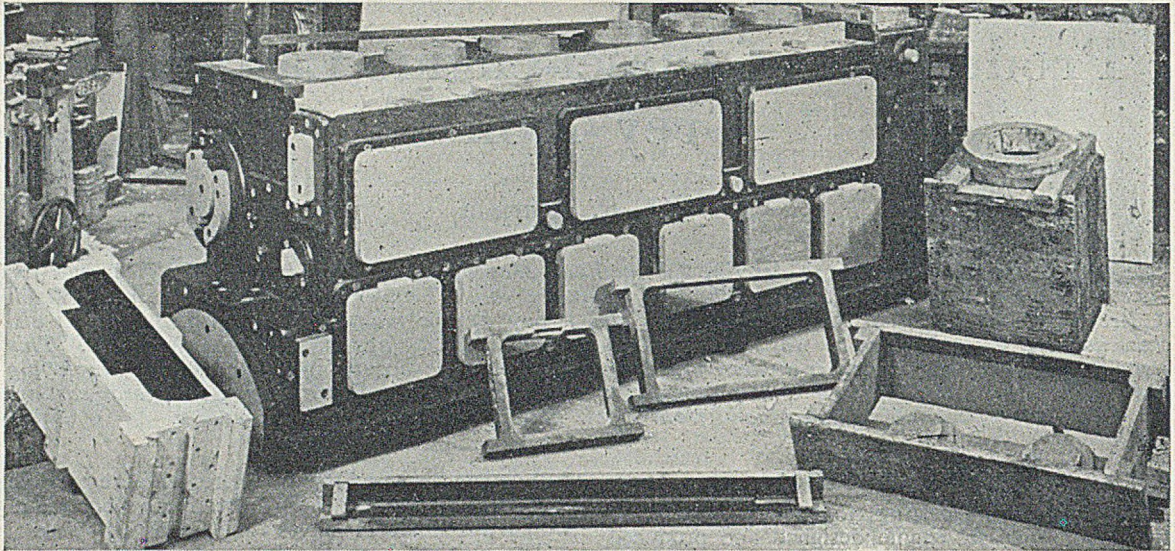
(a) and (b) (foot of facing page).—Views of the Pattern and Corebox Equipment for producing a Diesel-engine Frame Casting, weighing 3 tons, as a Six-cylinder Unit.
